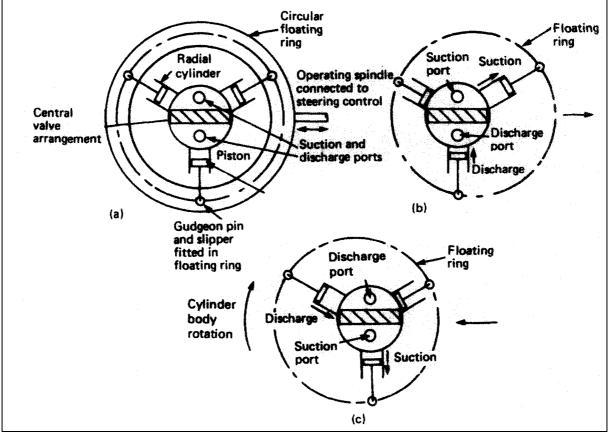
Hele Shaw pump – operating principle.
